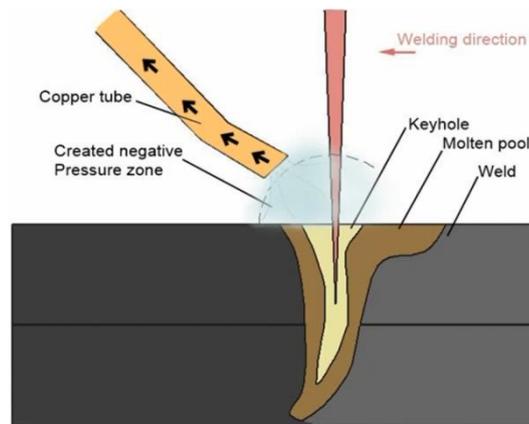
Vacuum-assisted welding for zinc-coated steels
